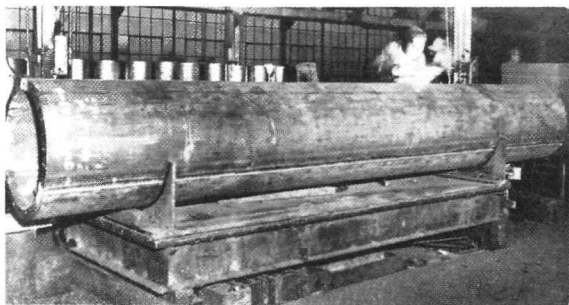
Shielded metal-arc welding of a Monel press roll.
